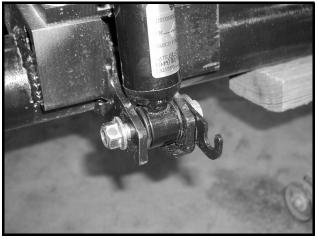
Remove Lower Driver-Side Shock Bolt
